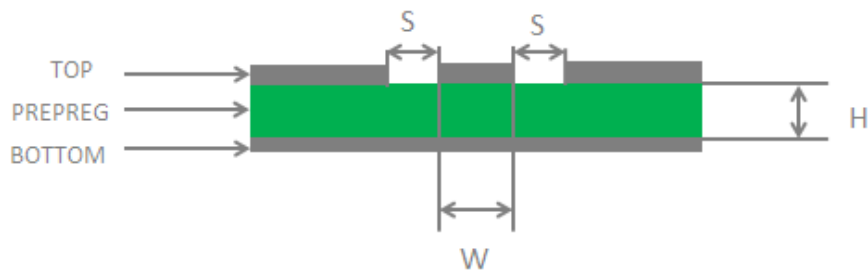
Coplanar Waveguide Line Design on a 2-layer PCB
